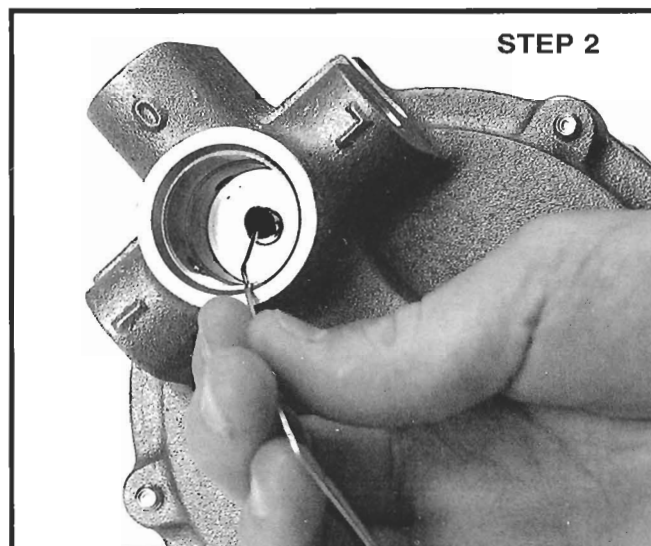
A paper clip easily pops the O-Ring out of the pilot body.
